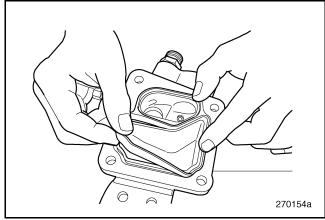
Seal Installation — Upper Coolant Pipe Housing
